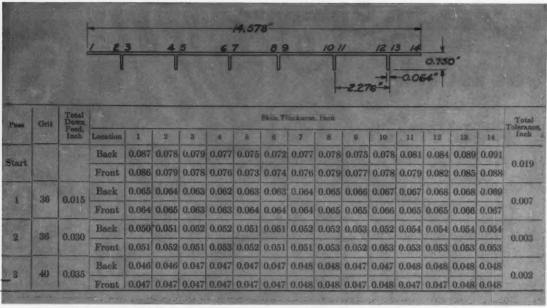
Tolerance of the skin is reduced from 0.019 inch, as extruded, to 0.002 inch after the final pass.
